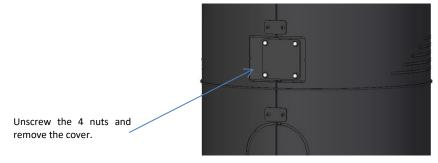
Rear view of the equipment; (M) section to remove for external air inlet
